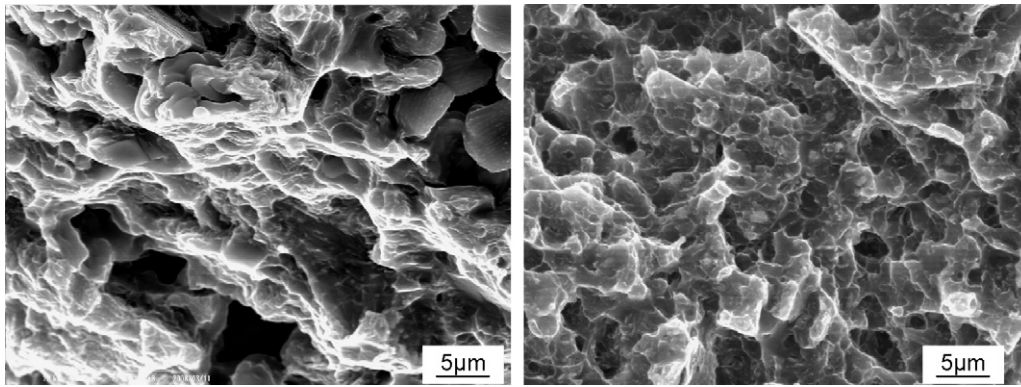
Fracture surface of tensile samples: (a) BM; (b) SZ.
